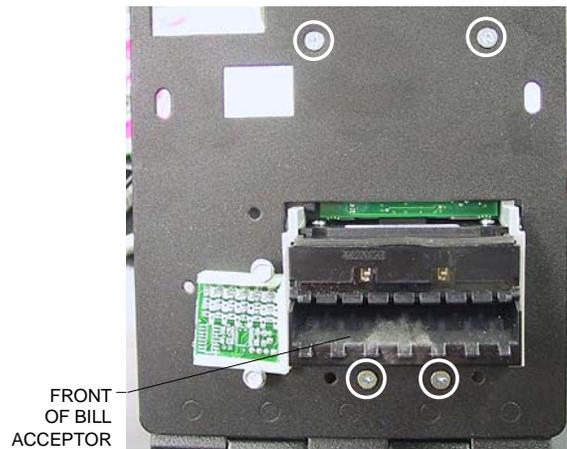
SCREWS FASTENING BILL ACCEPTOR TO MOUNTING PLATE
